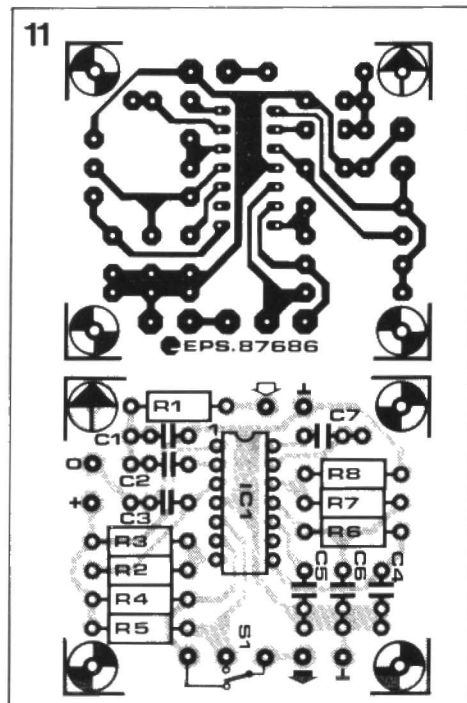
Printed circuit board for the single-chip RTTY decoder.
